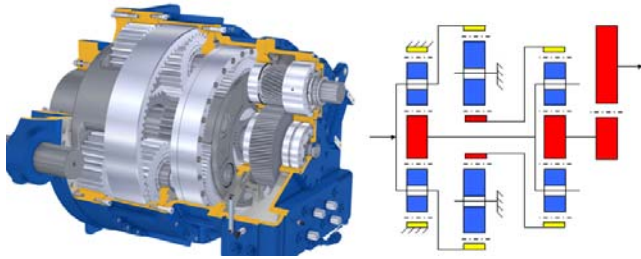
Differential gearbox, Bosch Rexroth, working principle
